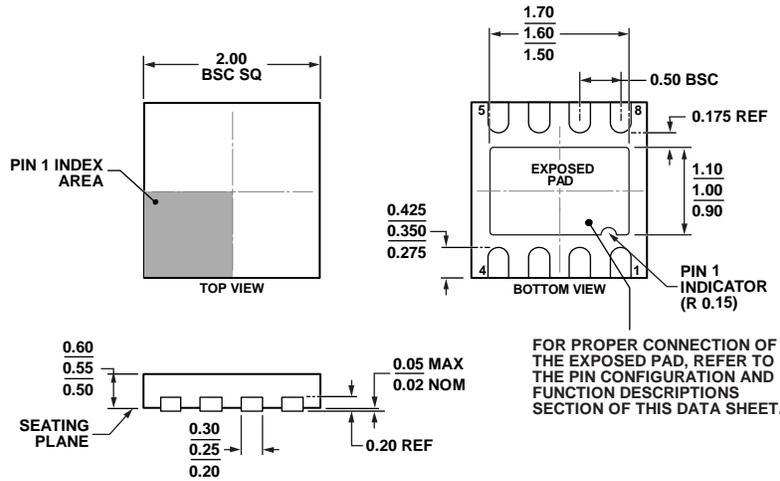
8-Lead Frame Chip Scale Package[LFCSP\_UD]
